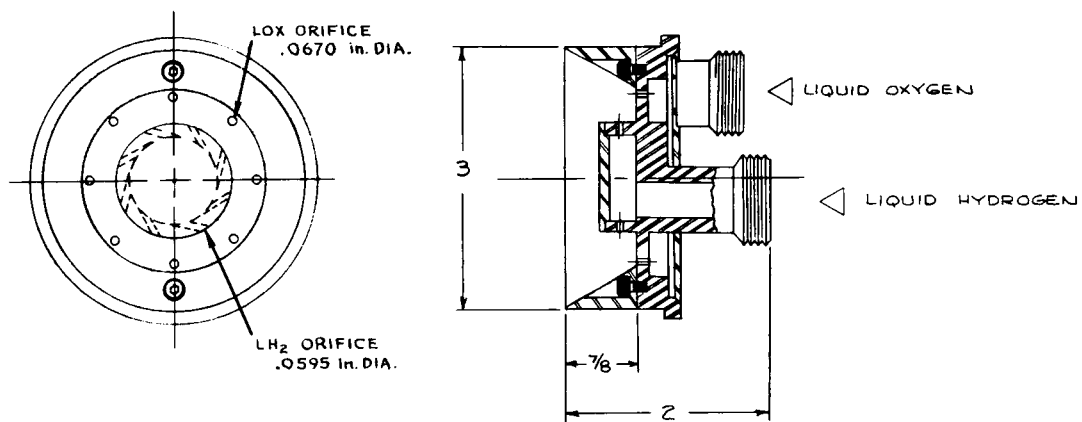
IMPINGING-VORTEX INJECTOR ASSEMBLY
